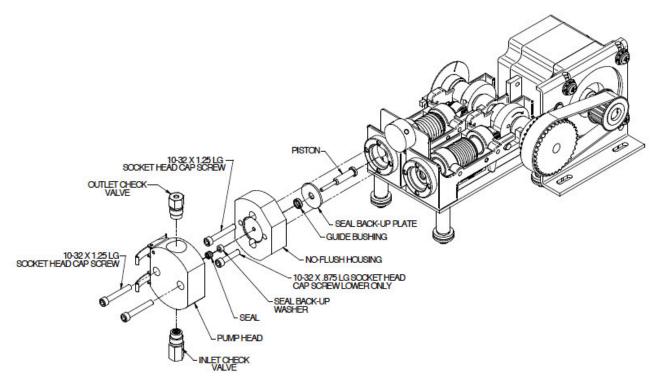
Pump Head/No-Flush Housing Assembly (*Note: Only one head/no-flush housing shown for clarity.*)
